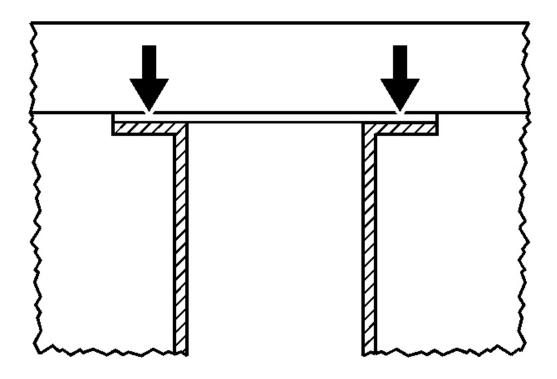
View Of Improperly Cut Cylinder Bore Sleeve Courtesy of GENERAL MOTORS CORP.
